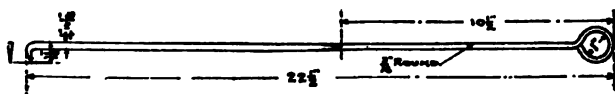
SEC. 10gg.—Straight packing tool, thin blade.
